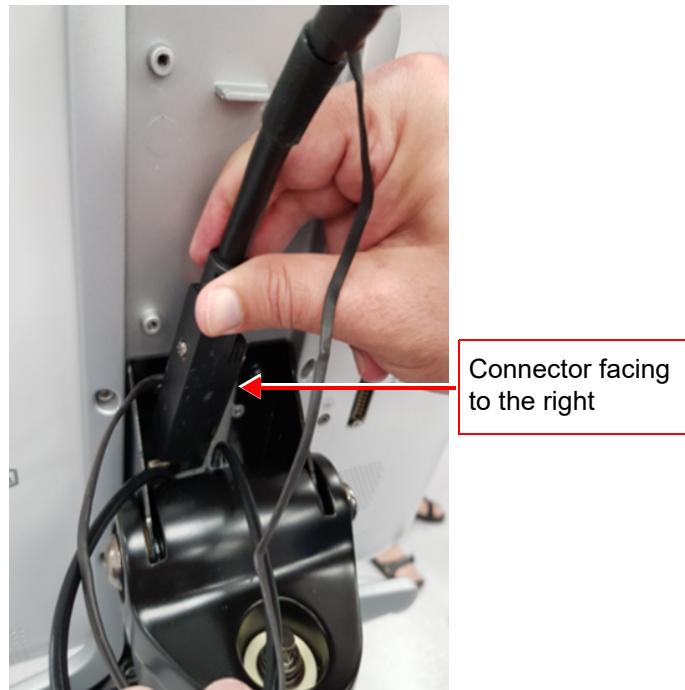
Routing the MPB to Cockpit Cable through Tilt Axis
